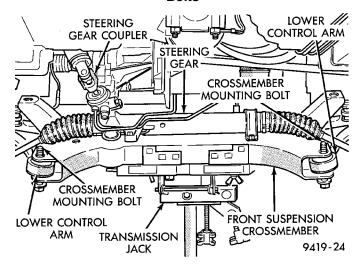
Crossmember Lowered For Removal Of Steering Gear
